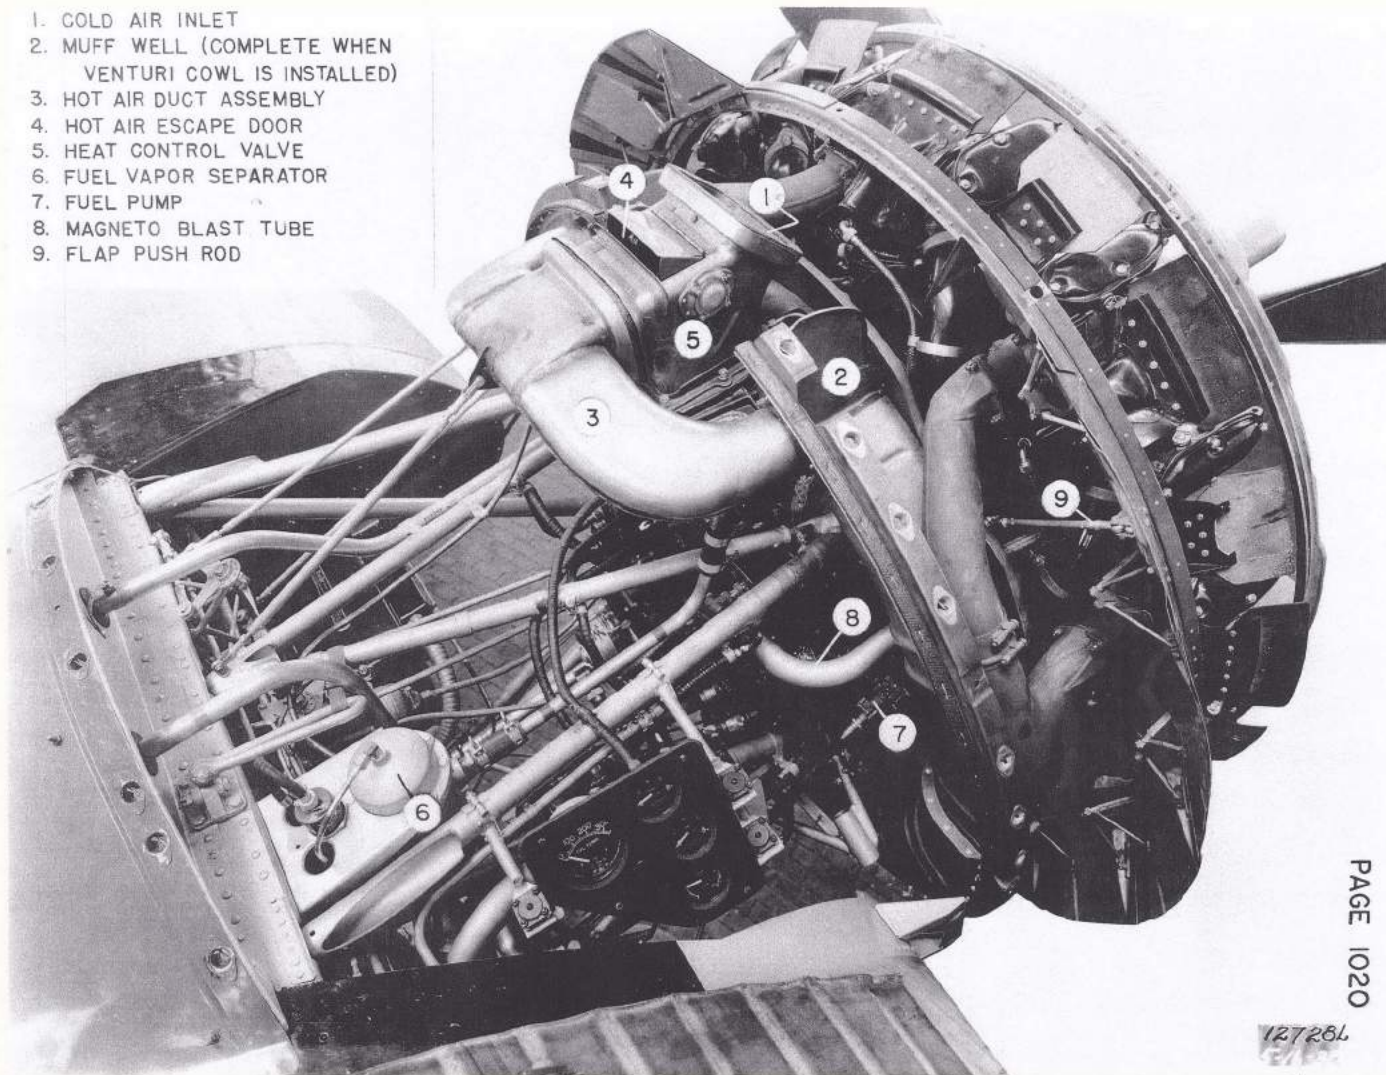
LEFT ENGINE INSTALLATION - TOP VIEW
